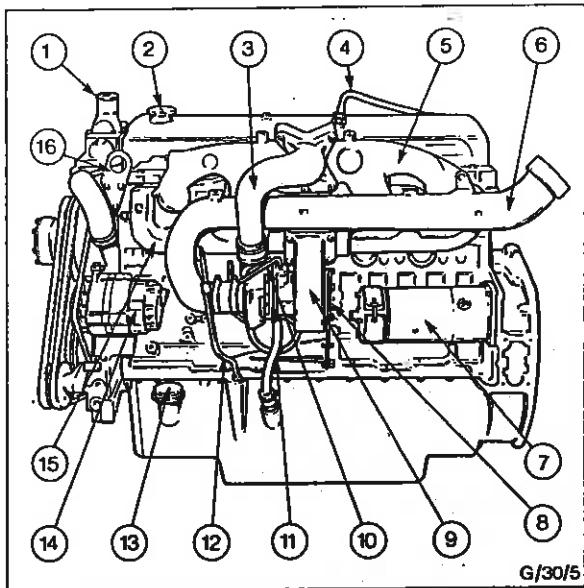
6 Cylinder Turbocharged Industrial Engine
